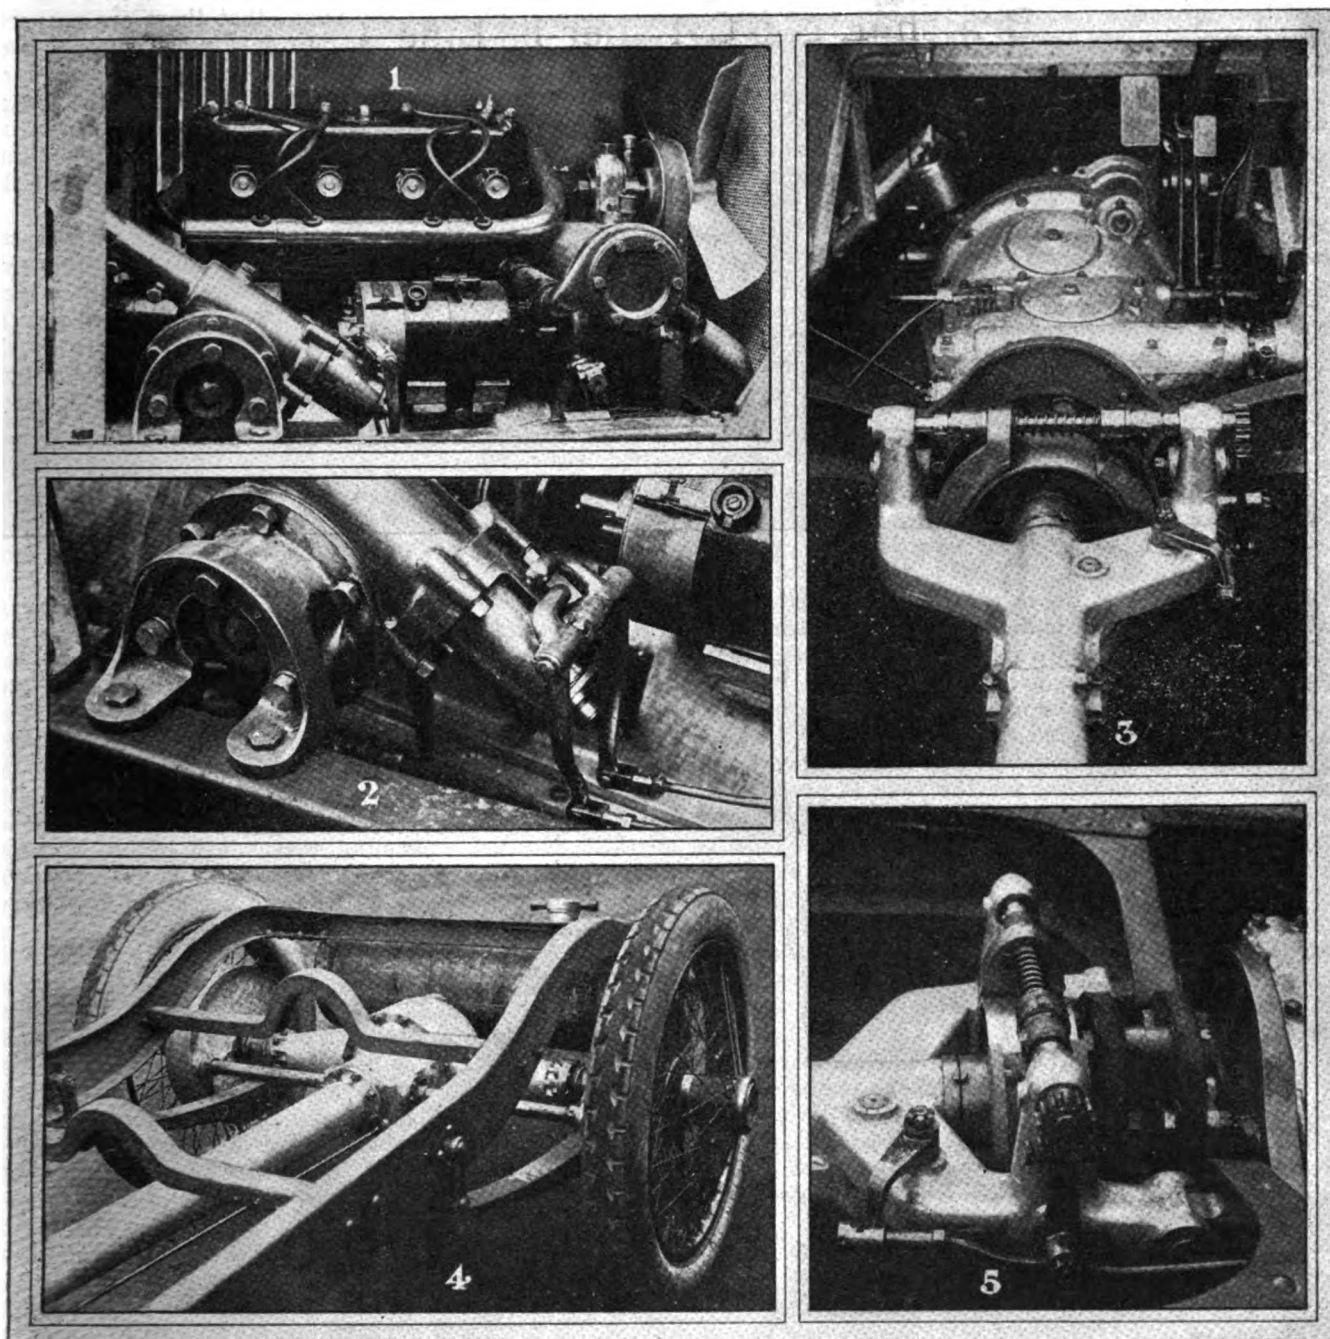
Right-hand side of Bignan Sport engine, showing water pump and electric generator. Fig. 2—The steering gear on the Bignan Sport can be adjusted to any angle. Fig. 3—Bignan Sport chassis, showing the forked arms of the torque tube, external brakes and gear box. The tire pump is inside the gear box. Fig. 4—Bignan Sport rear axle. The complete absence of brake levers will be noticed. Fig. 5—Forked arms of the torque tube, showing the external brake
